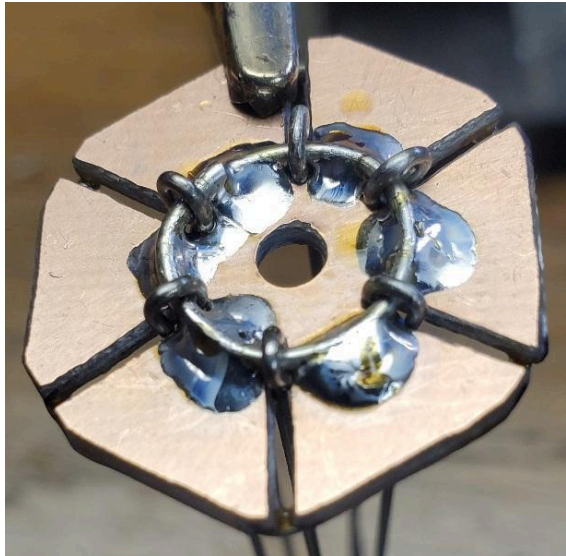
Soldering complete and spoke wires freely hanging vertically at rest.
